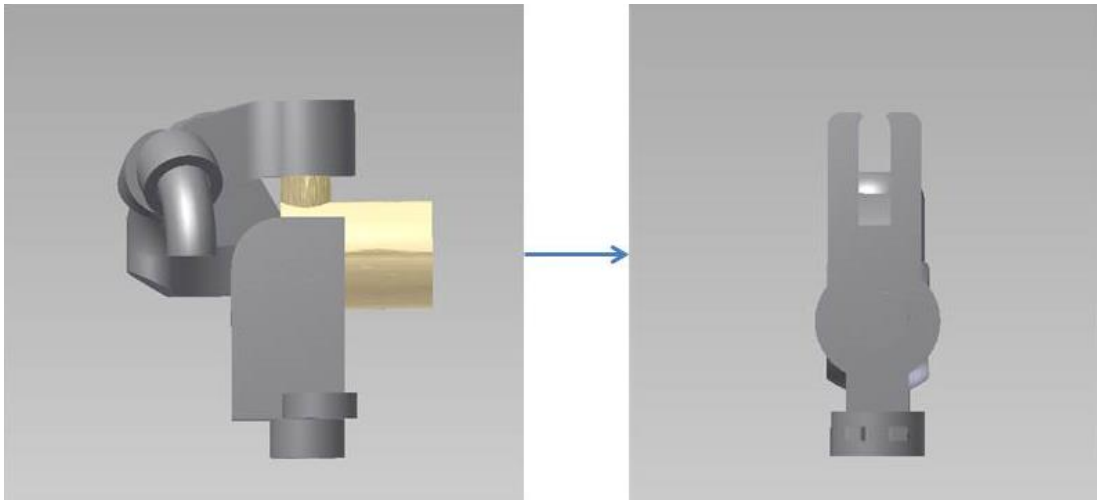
Side profile of the four part mechanism from the aforementioned Mk1 (left). The four part mechanism is redesigned to be more compact in the Mk 2 design (right).
